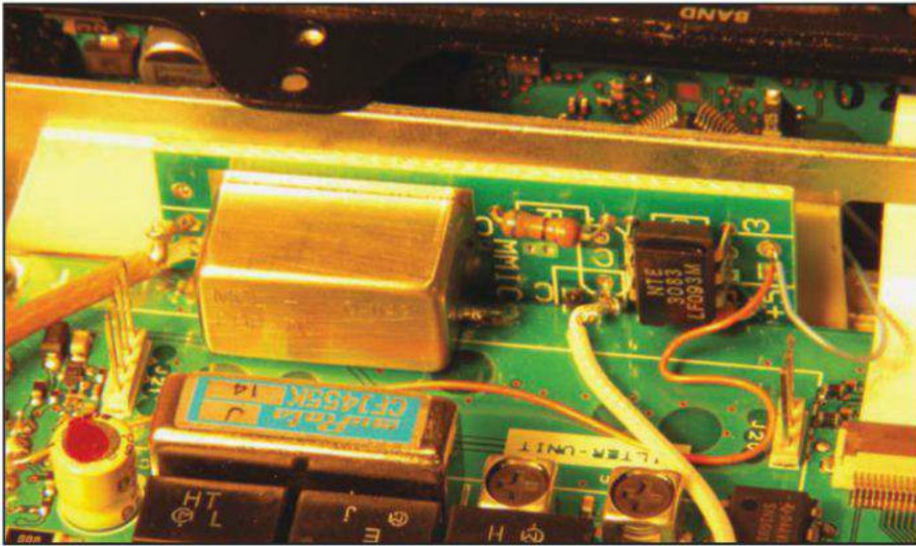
Panadapter board installed in the FT-817 (no CW filter).
